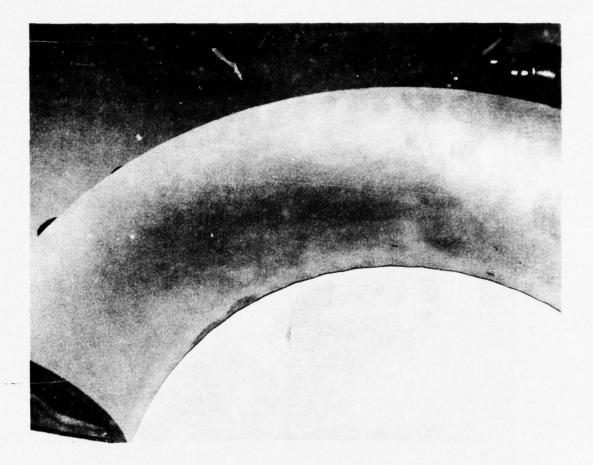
Compressor housing erosion pattern in vicinity of discharge from axial compressor after 5.6 hours' sand exposure.
